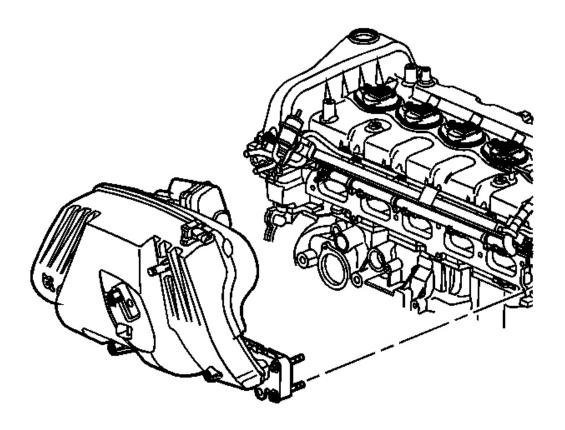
View Of Intake Manifold Courtesy of GENERAL MOTORS CORP.
